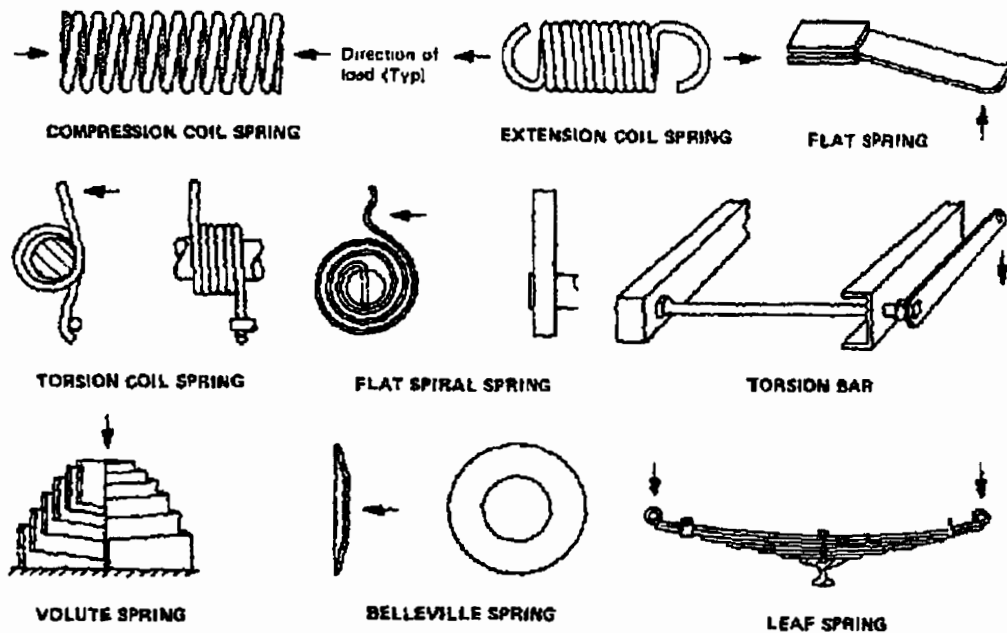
Types of mechanical springs (Hindhede *et al*,1983)
